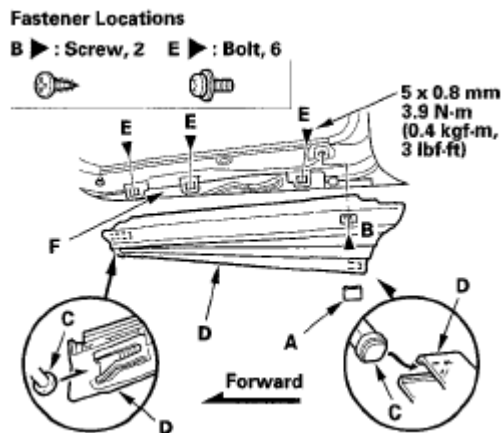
Identifying Bracket Covers, Lid, Pins And Screws With Torque Specifications
